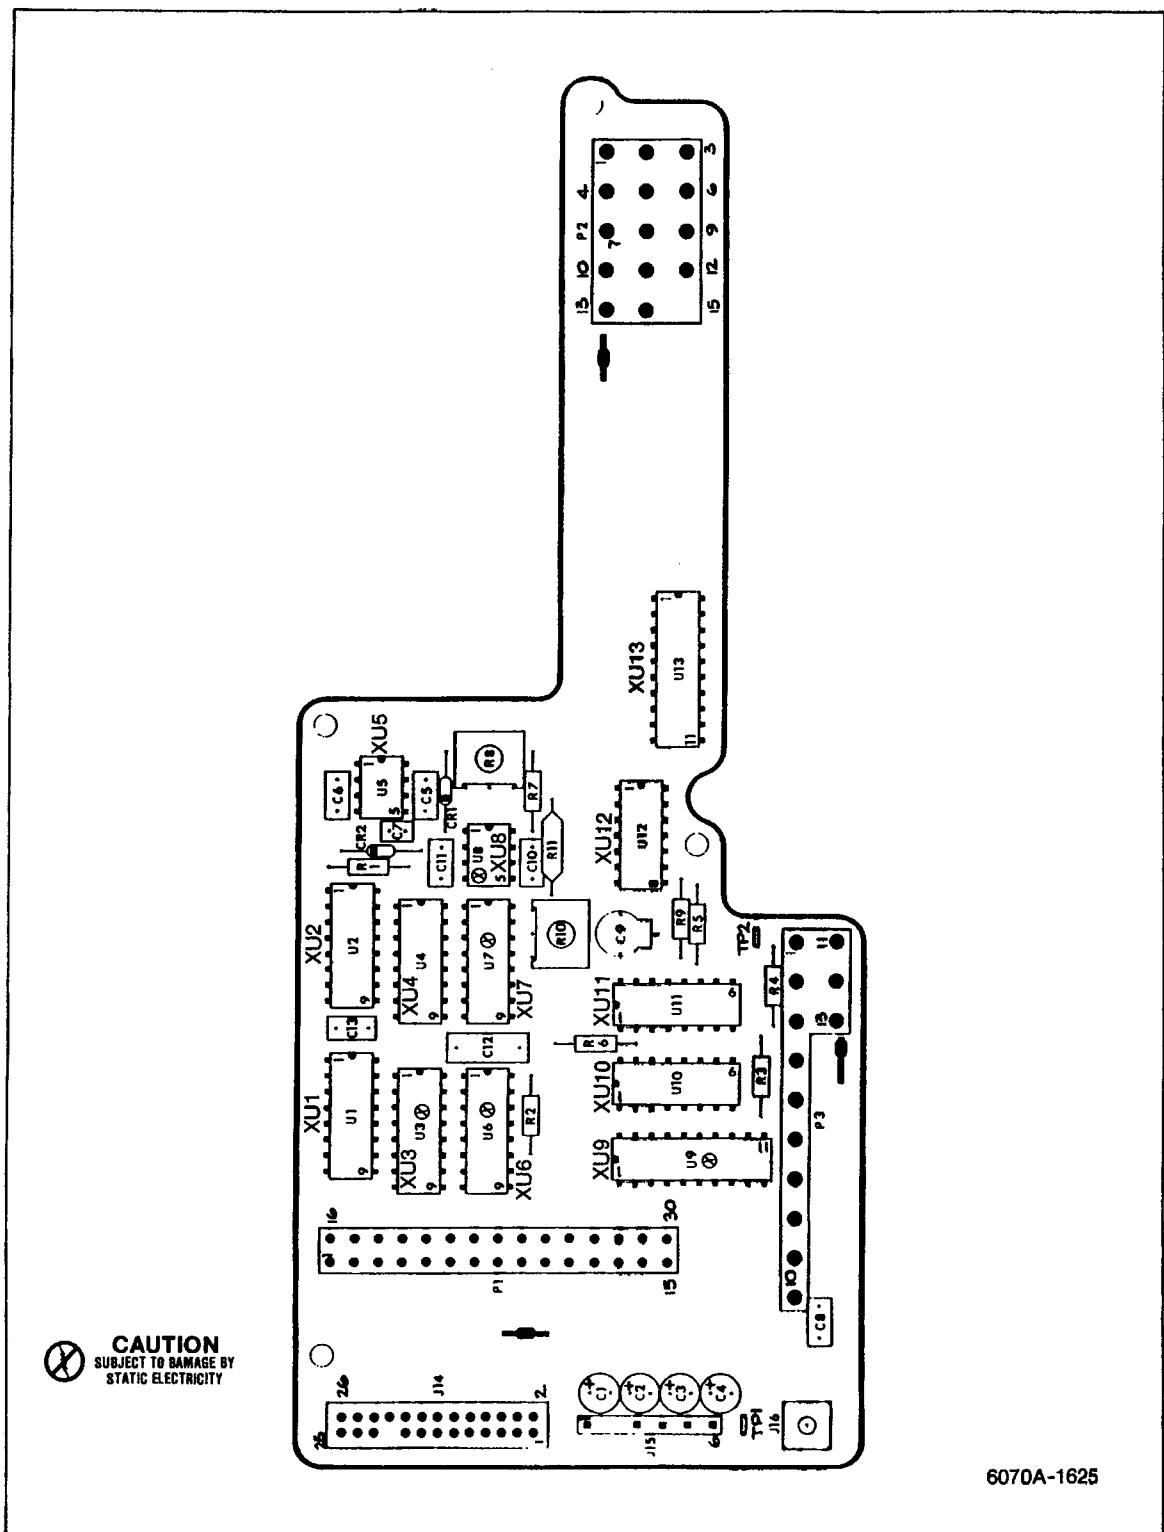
A3A8 Synthesizer Control Buffer PCB Assembly
